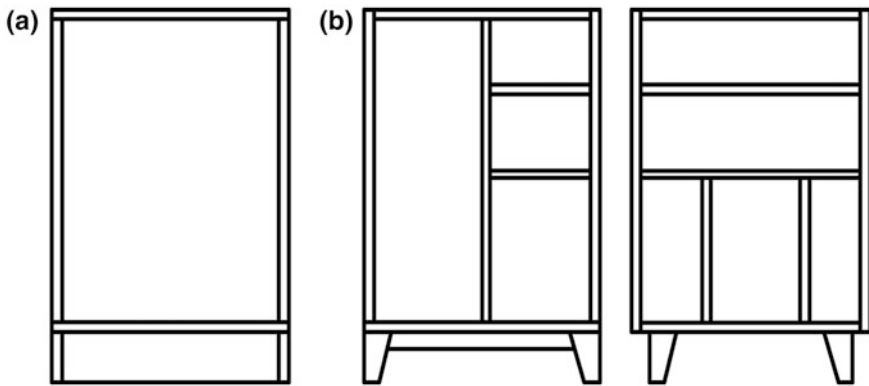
Body of the furniture piece: a single-chamber, b multi-chamber
